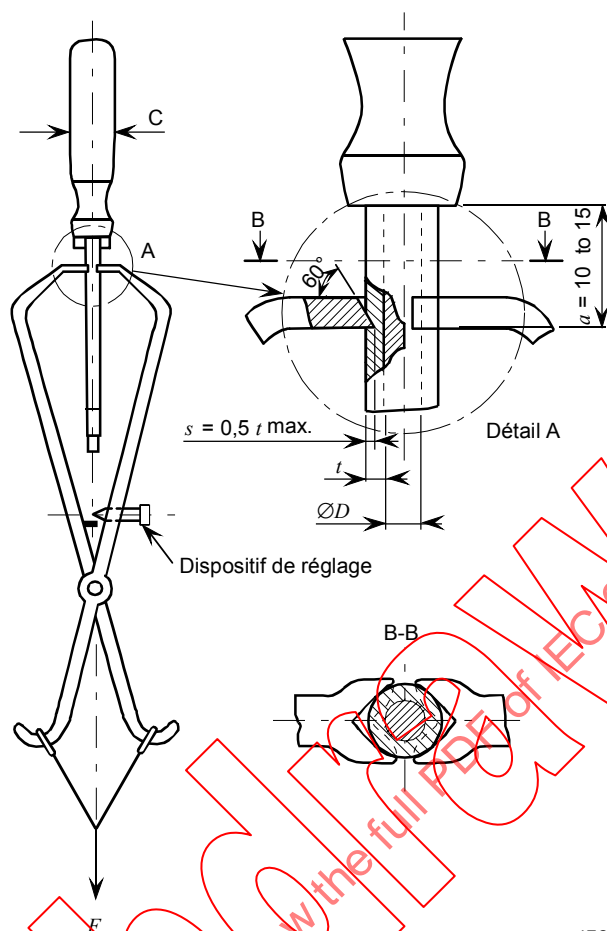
Principle of the testing device for checking adhesion of the insulating coating on conductive parts of the tools (see 5.7.2)
